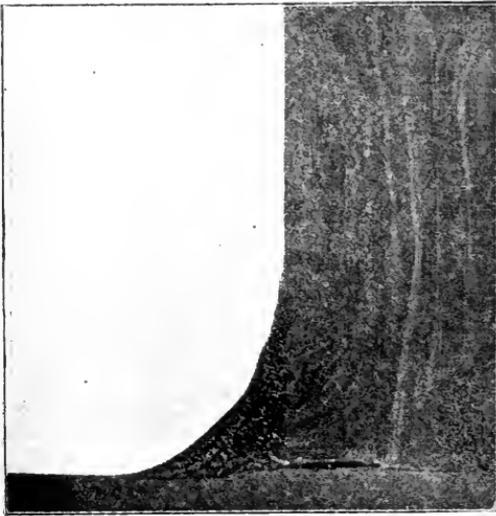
ARC-WELDED PIPE AND FLANGE.
